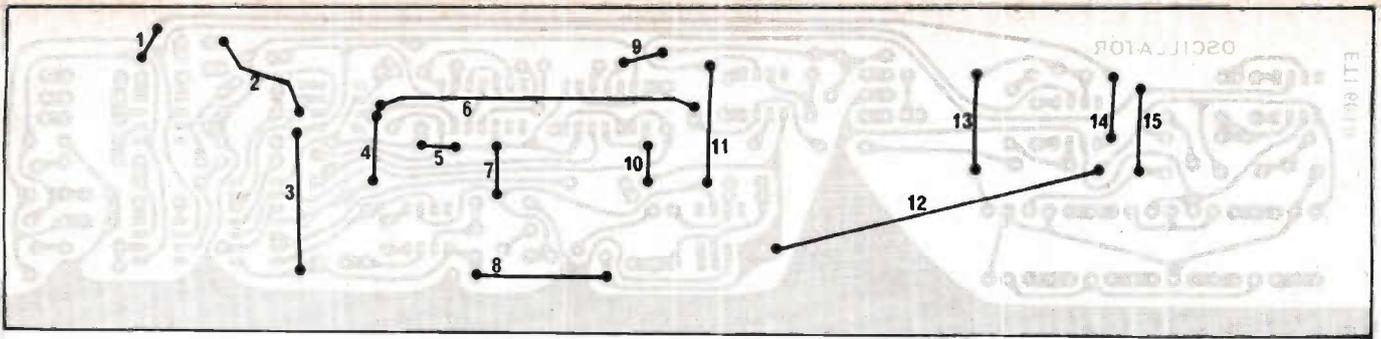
Linking required on the oscillator board. This should be installed before components are fitted.
